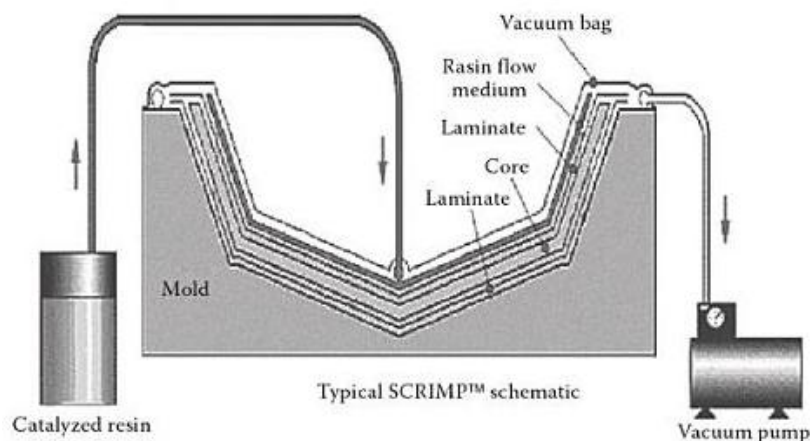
Mould section view for the Seaman Composites Resin Infusion Process [28]
